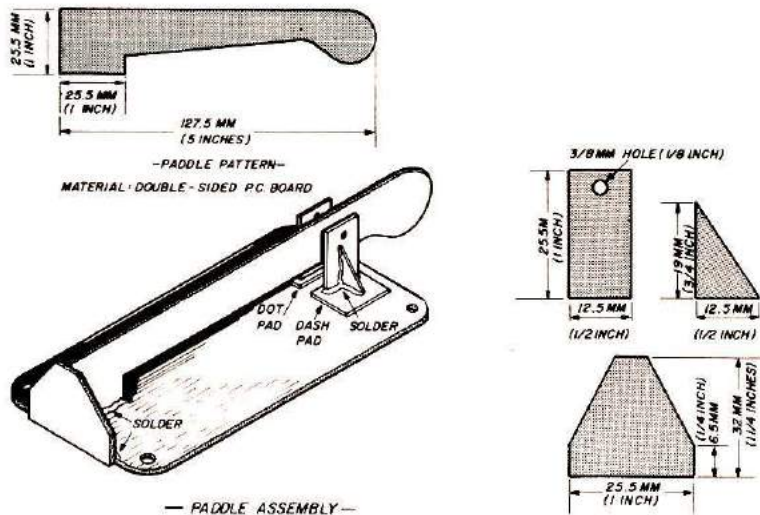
The paddle assembly can be made from scrap double-sided printed-circuit board material. The pieces are cut and filed to shape, then are soldered together and to the top of the circuit board. The circuit board is double-sided, with copper pads on the top for mounting the paddle and the dit and dah contact-screws.
